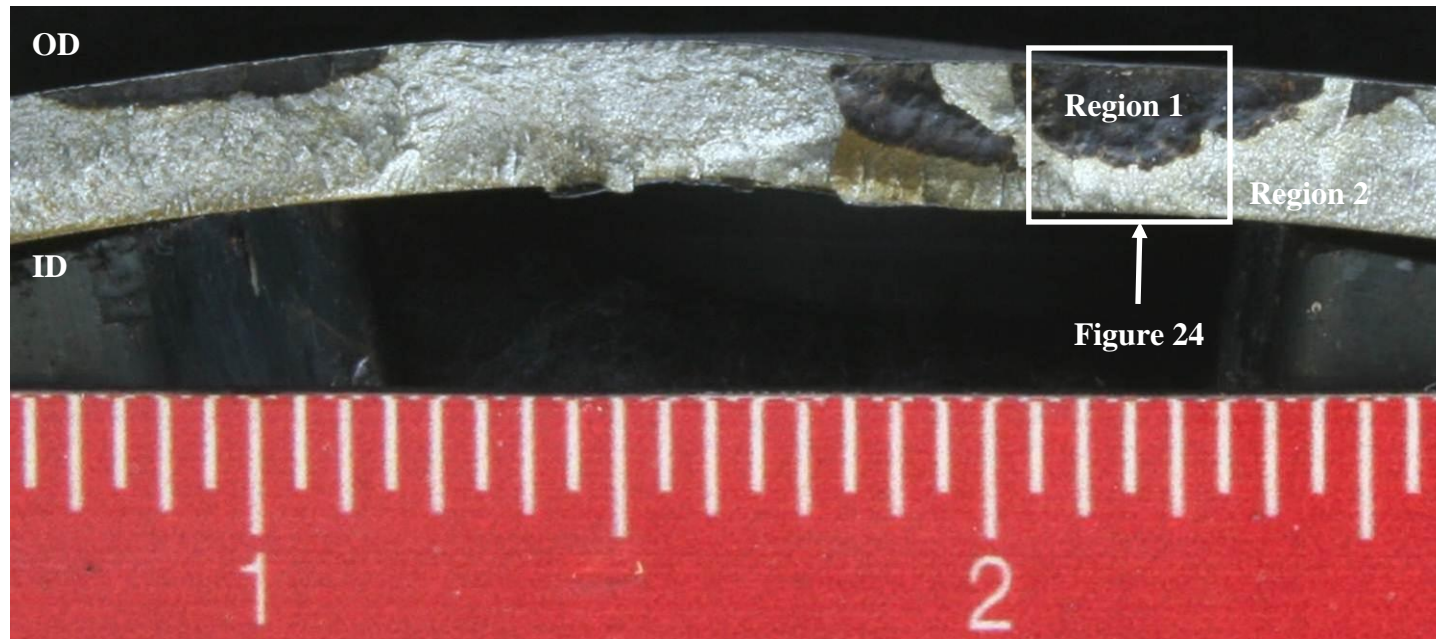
Photograph of the fracture surface removed from Crack Colony 1.
